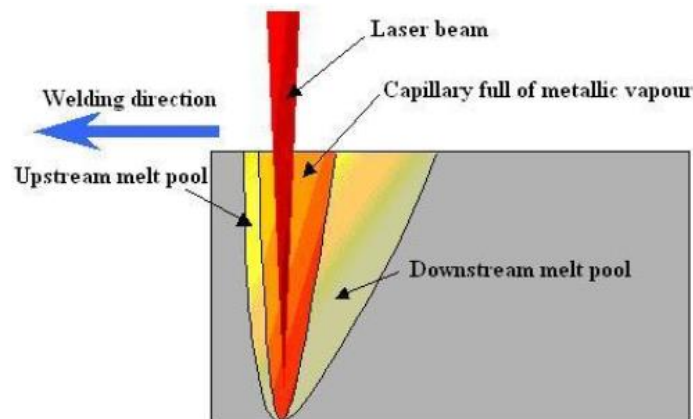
Basic draft of laser welding [[SOURCE]].
